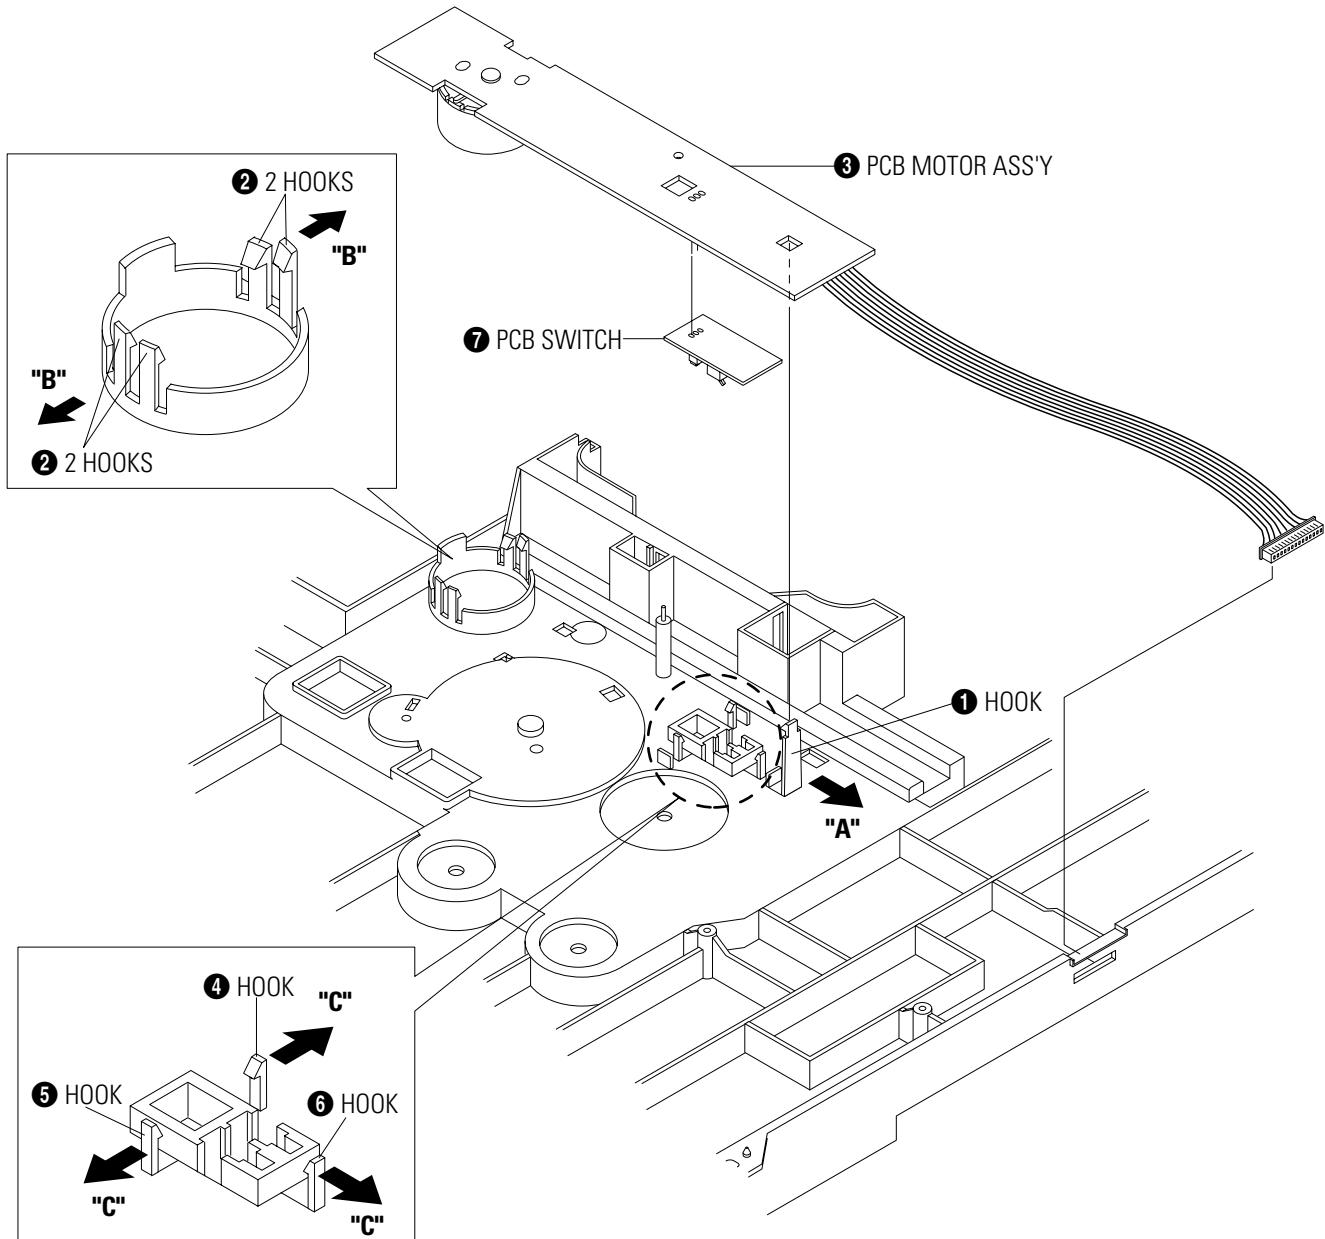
PCB Motor Ass'y, PCB Switch Removal
